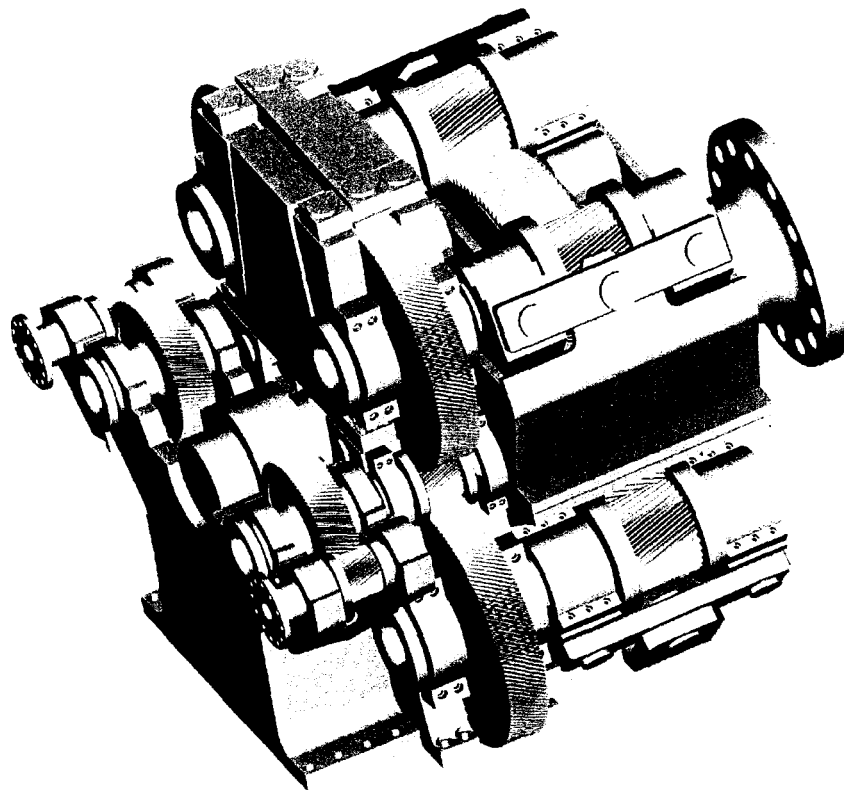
MODULAR SELF- ALIGNING GEARBOX ASSEMBLY
